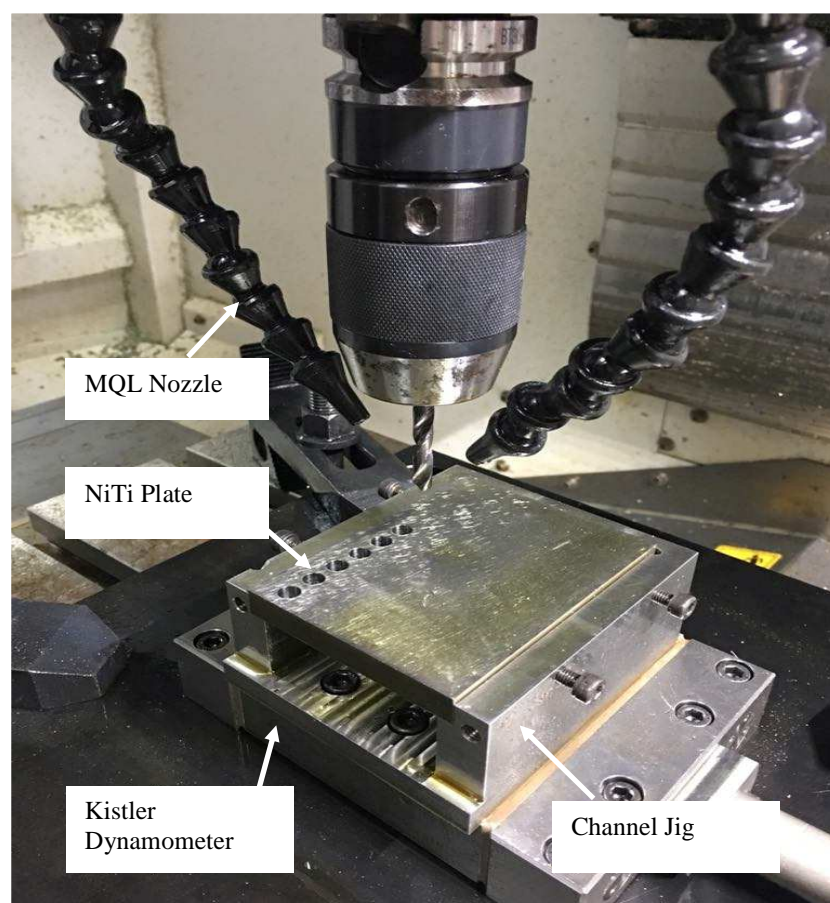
Drilling experimental setup consists of Kistler force dynamometer, channel jig and lubrication nozzles
